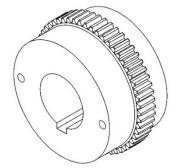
STEEL GEAR SINGLE FLEX COUPLING (ISO)
